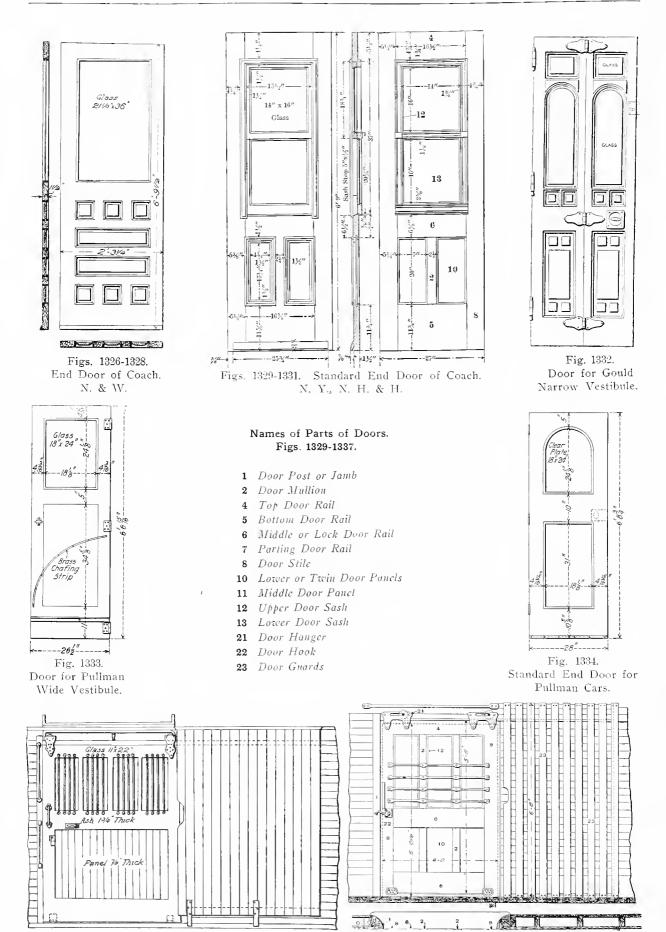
Baggage Car Side Door. N. Y. C. & H. R.
